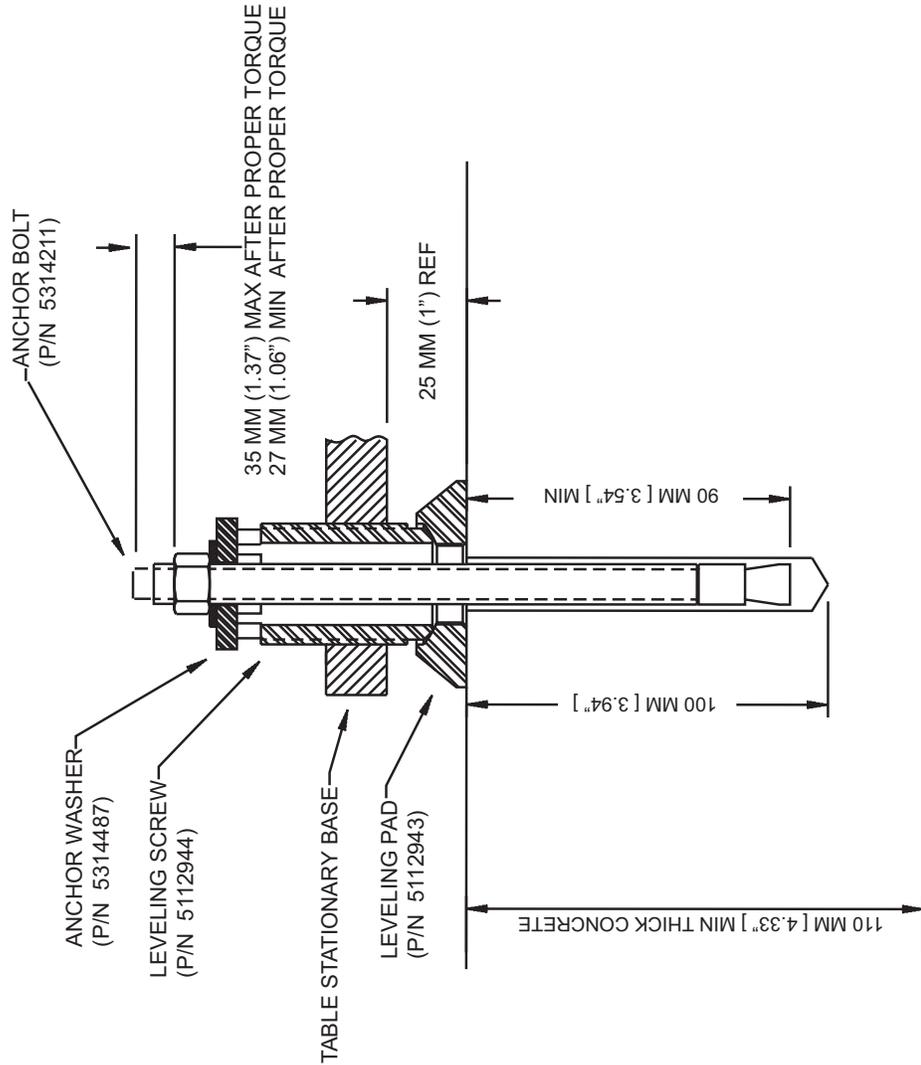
Typical Floor Anchor, Table (High capacity table)
